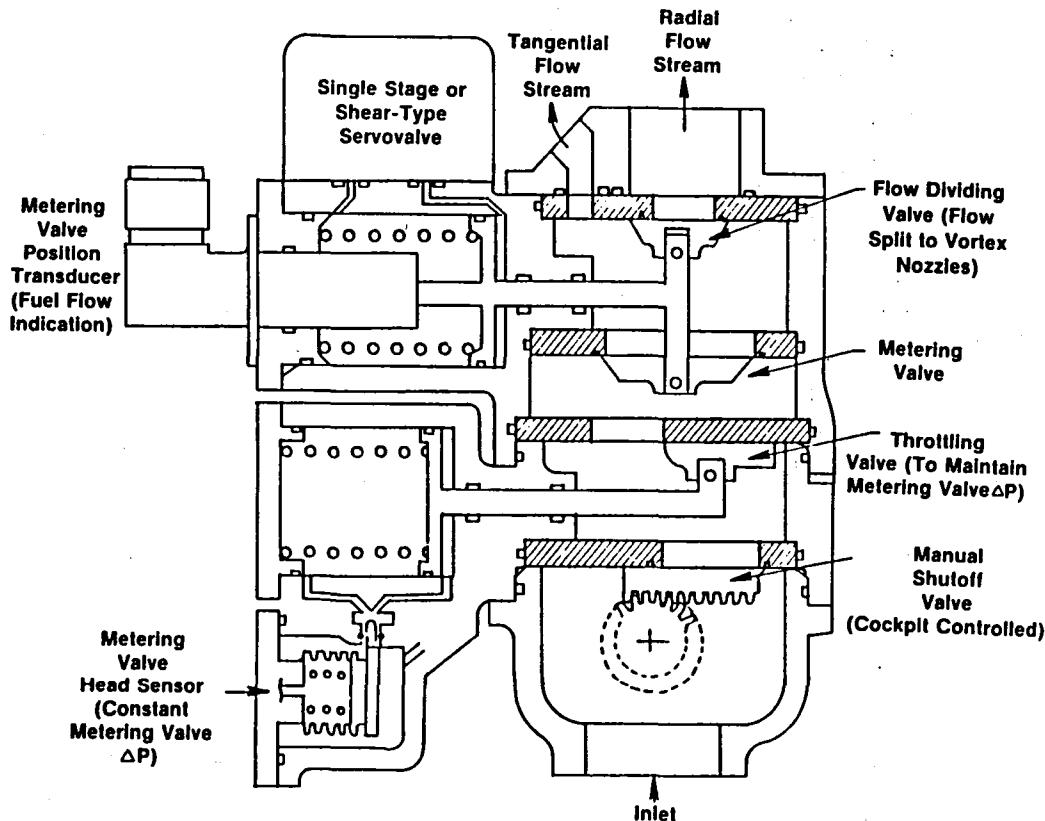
Fuel Metering Assembly with Shear-Type Valves.
